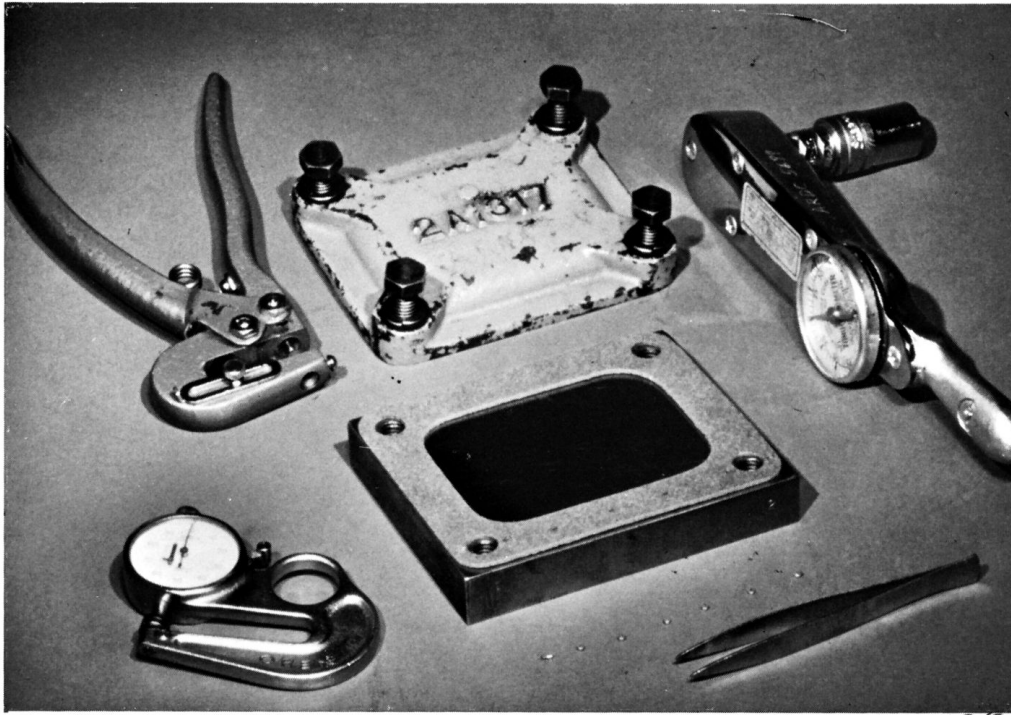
Equipment for Performing the Solder-Plug Test of Gasket Compressions
